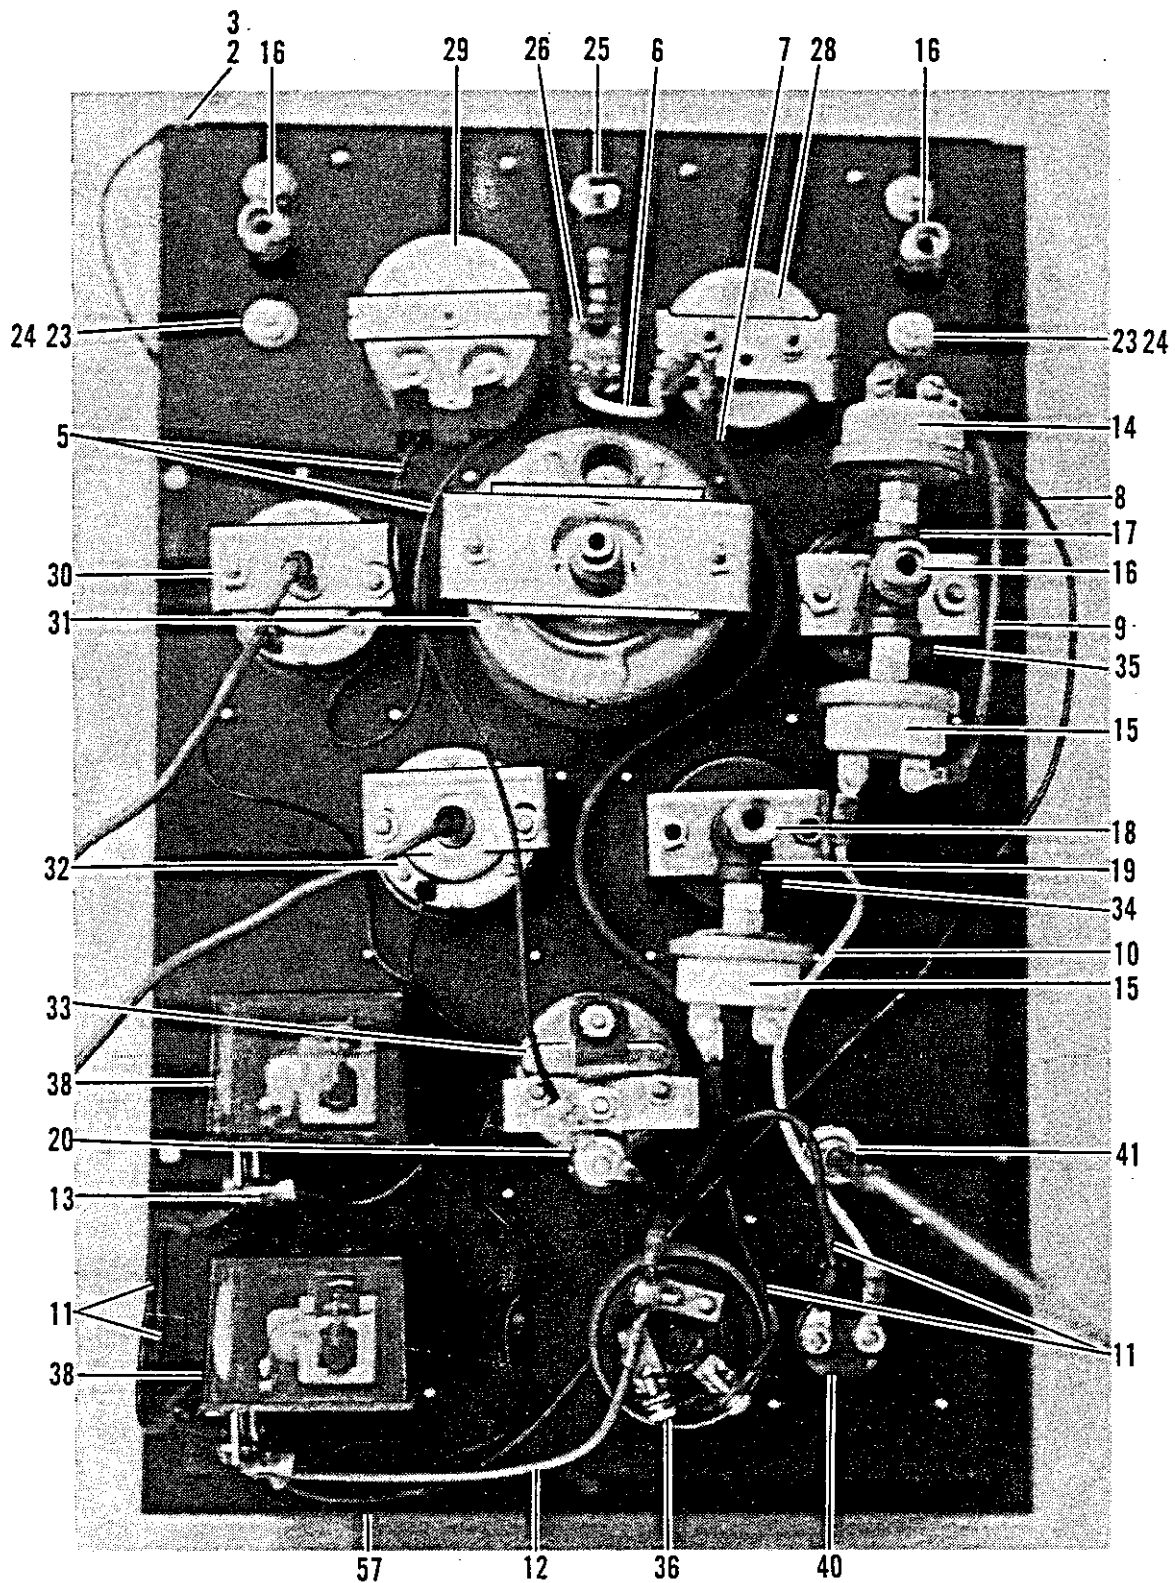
Instrument box assembly (sheet 1 of 2)
